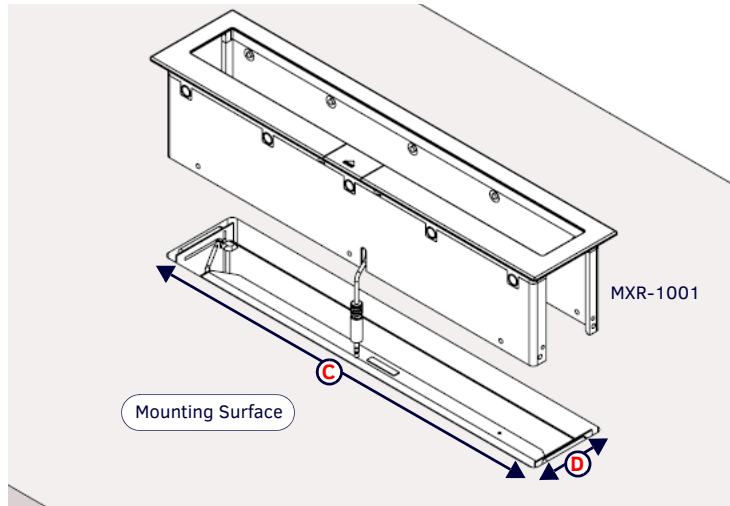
HOLE CUTOUT DIMENSIONS FOR THE MOUNTING SURFACE
